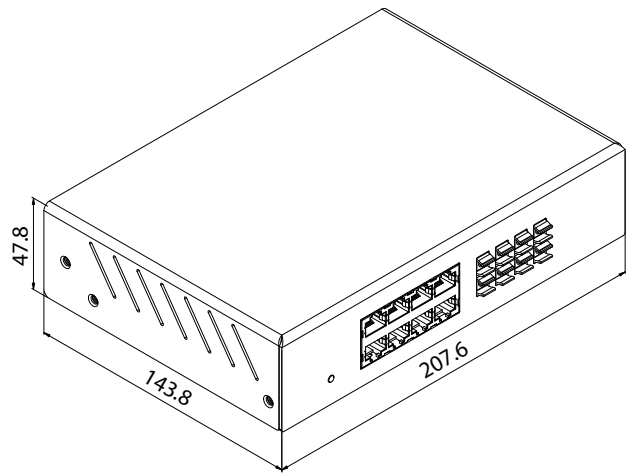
Mechanical dimensions (in mm) of B-Box Micro.
